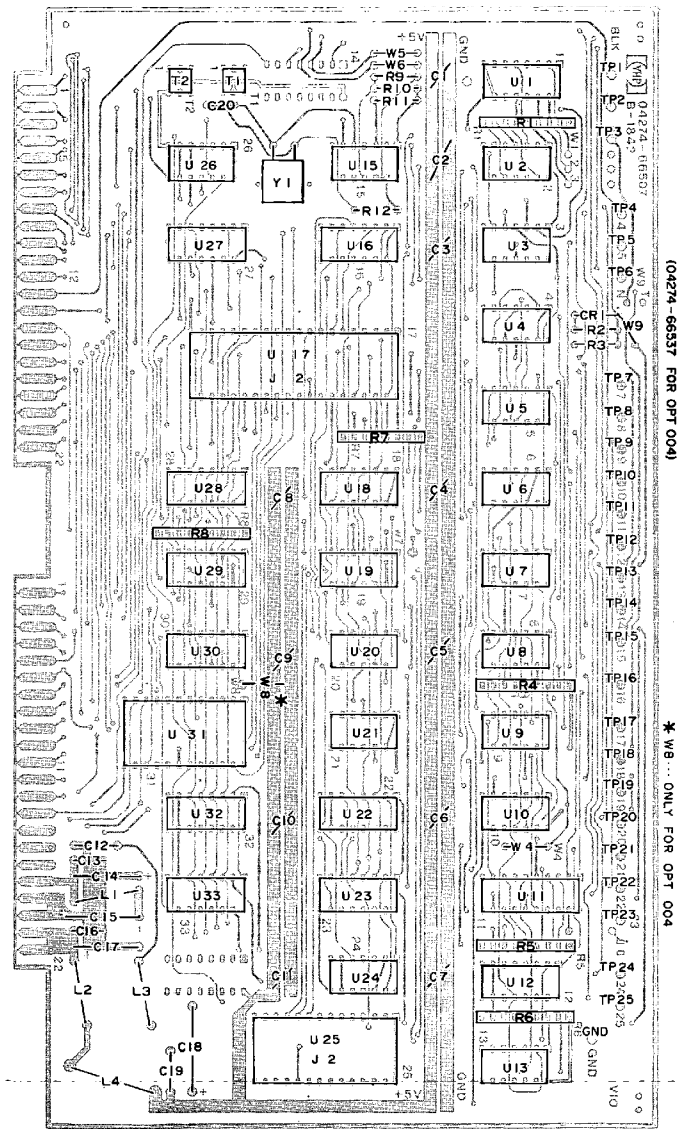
A7 PERIPHERAL CONTROL ASSEMBLY COMPONENT LOCATIONS.
